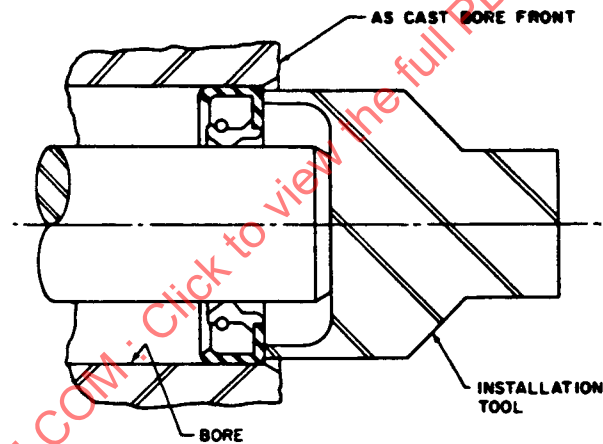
Through Bore: Installation Tool Bottoms on Shaft
